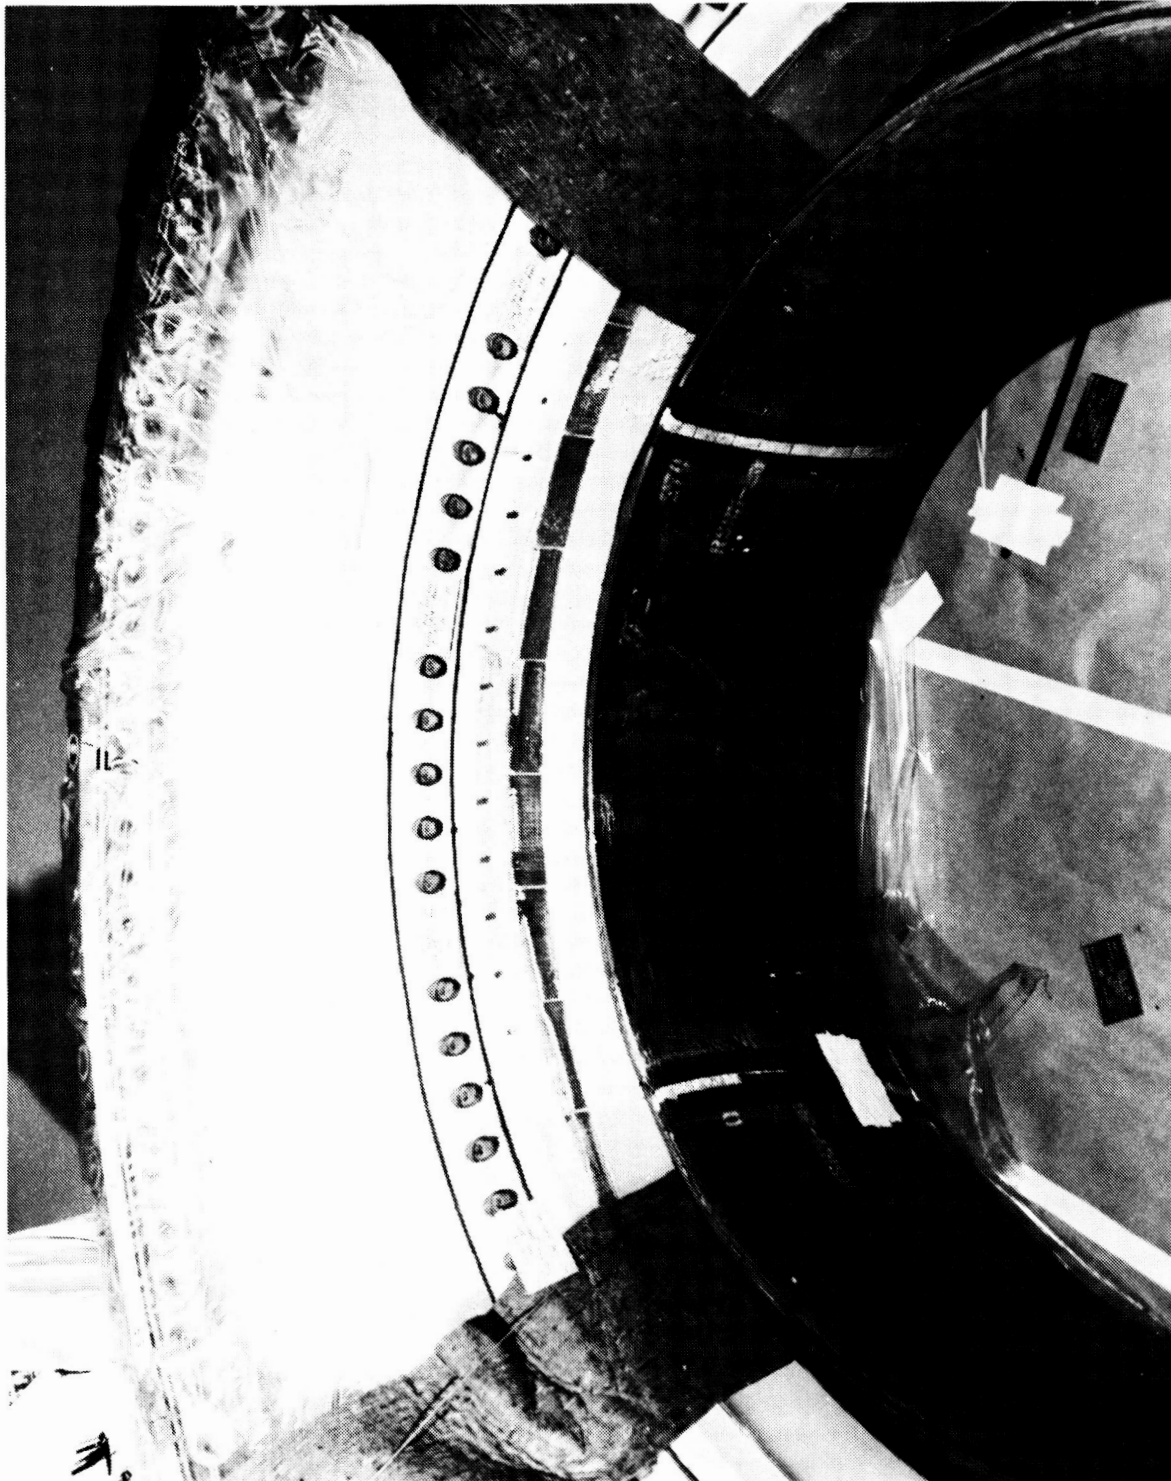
STS-27B Bearing Aft End Ring Snubber Impact Scratches
